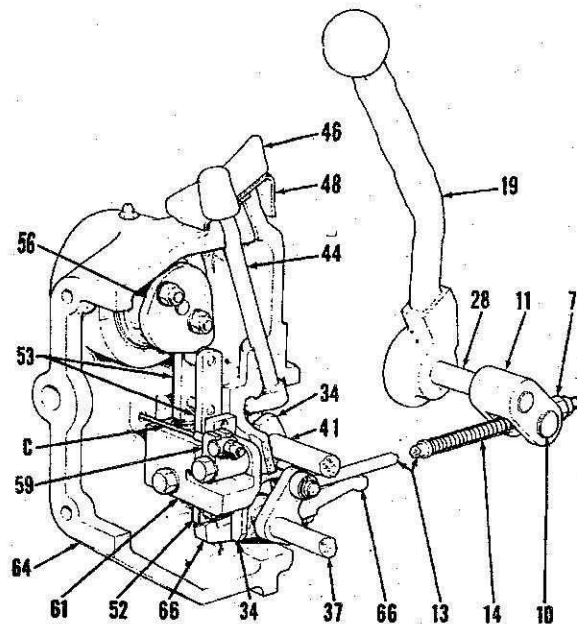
Assembly view of control lever and control mechanism. Refer to Figs. 204 and 205 for exploded view of control lever and mechanism.
